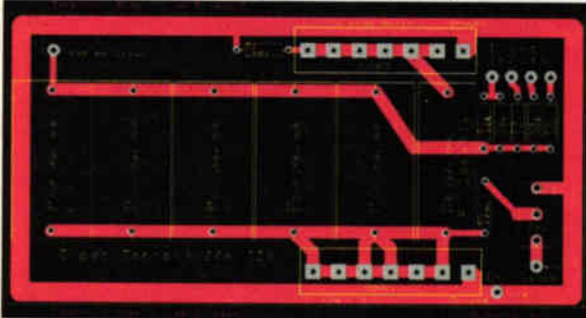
The 110 x 55 mm single sided PCB used to assemble Figure 3, the 1kHz DC blocking buffer network.
